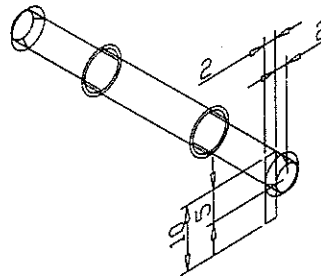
Profile revolved, chamfers placed, sketch plane set, and profile constructed
